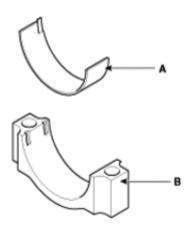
Identifying Bearings And Connecting Rod Cap Courtesy of HYUNDAI MOTOR CO.
